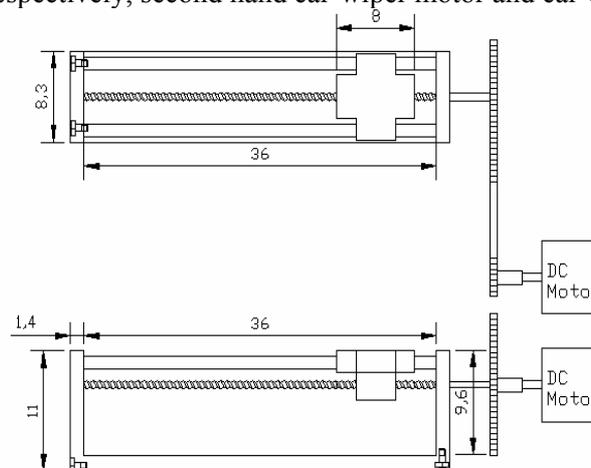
Side and Top Views of the Horizontal Screw Mechanism, Dimensions are in cm
